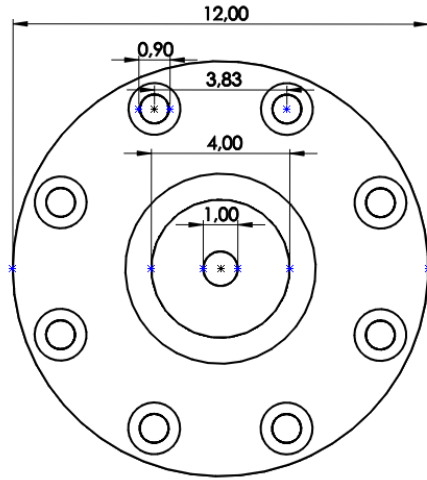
Top view of spacer disc, with dimensions in millimeters.
